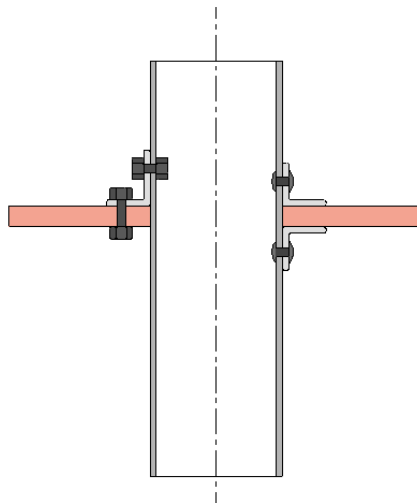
Joining by mechanical fastening: through bolts on the left side and trough rivets on the right side.
